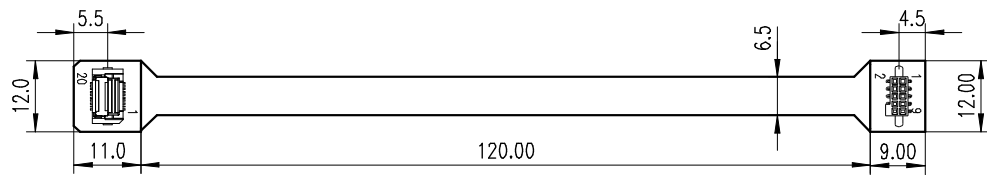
ECU Adapter ETAM8 (bottom view)
